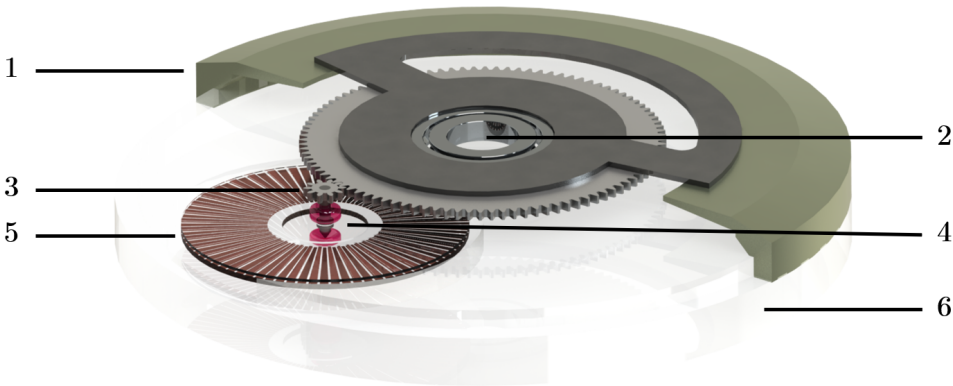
Render of the energy harvester containing the micro-electret transducer using optimized parameters highlighting the component showing the watch rotor (1), the micro-ball bearing (2), the gear transmission (3), the jewel bearing suspension of the electret rotor (4), the electret rotor & electrode stator (5) and the outline of the whole watch movement (6).
